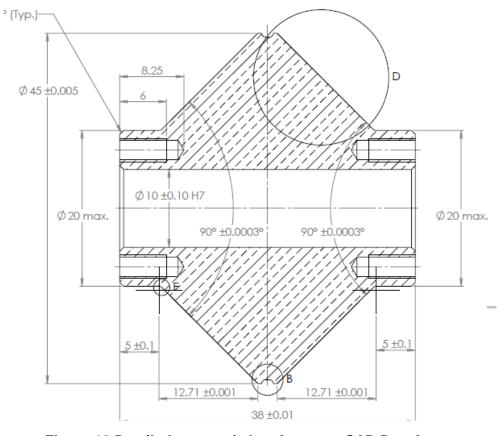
Detailed aerostatic bearing rotor CAD Drawing
